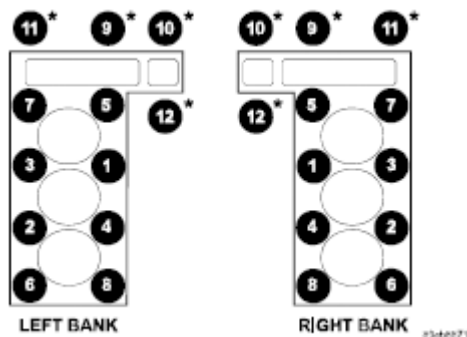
Identifying Installation Sequence Of Cylinder Head Bolts
